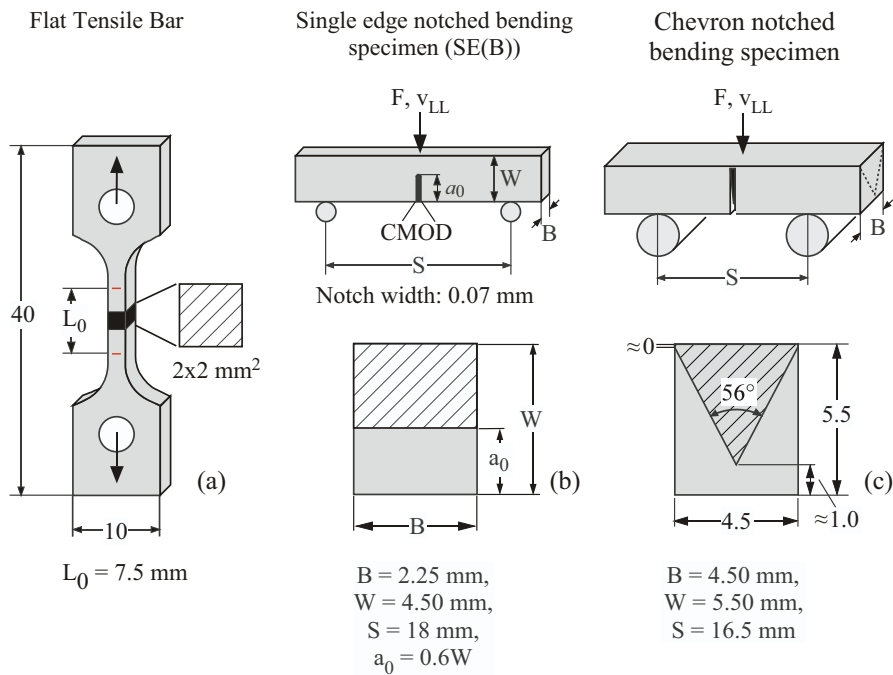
Geometries of the specimens: (a) flat tensile specimen, (b) single edge notched bend specimen (SE(B)), (c) chevron notched bend specimen.
